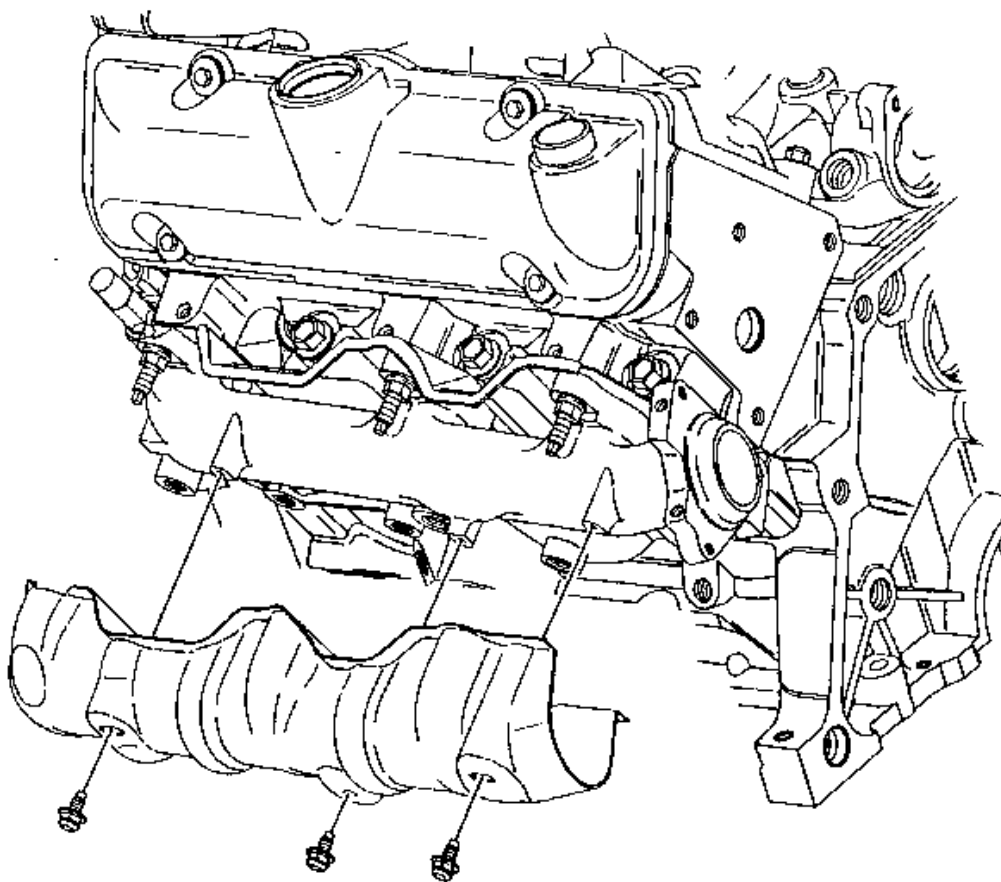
View Of Exhaust Manifold Heat Shield & Bolts - Left
